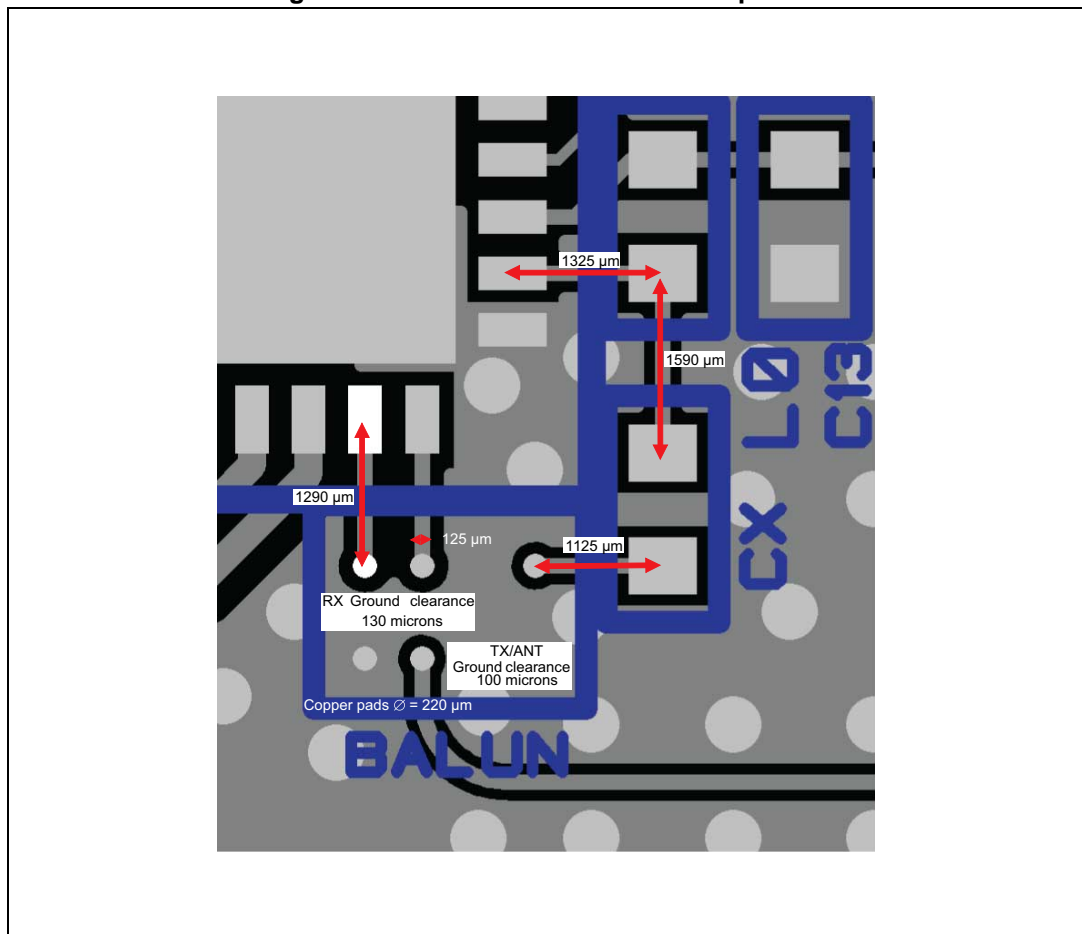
Footprint - 3 mils stencil - non solder mask defined
